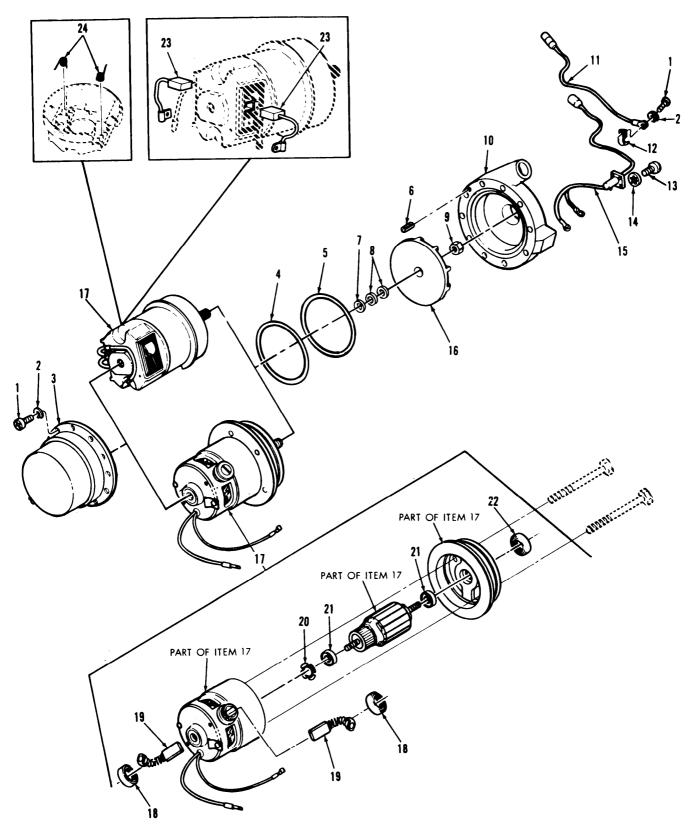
AIR CLEANER CENTRIFUGAL FAN ASSEMBLY.
